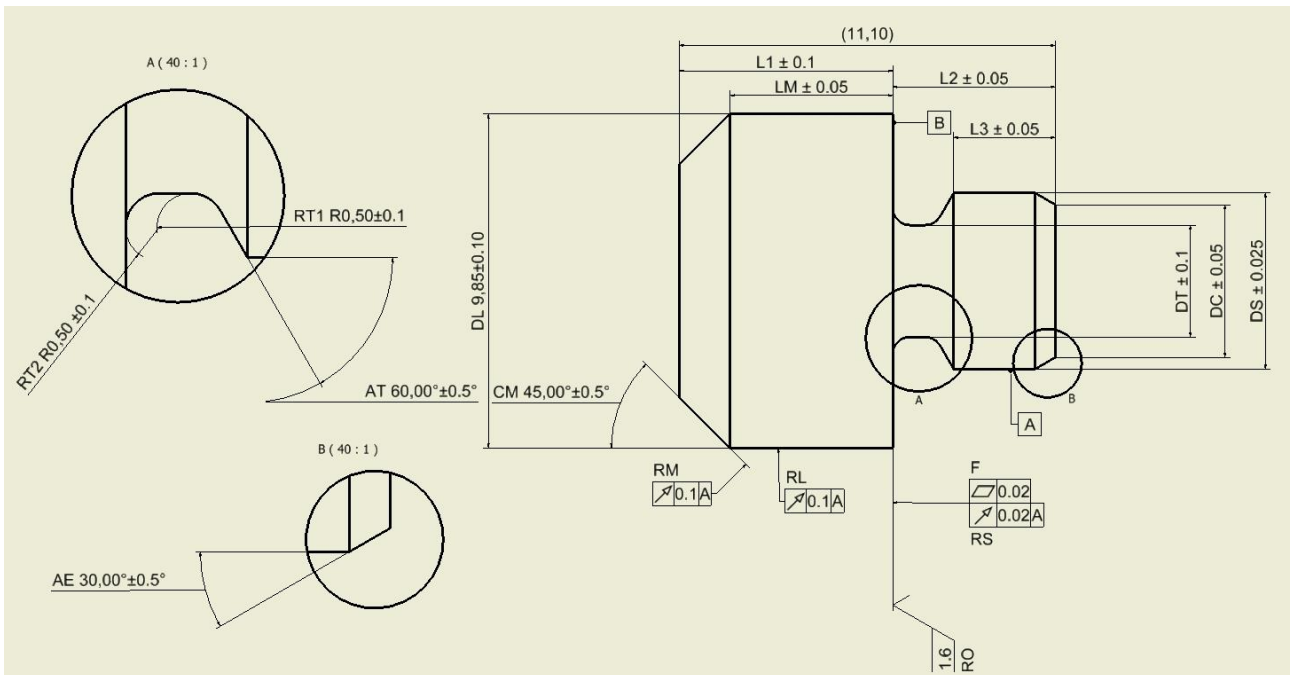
Side-view illustration of the dimensional requirements of the Top-end fuel rod endcap¹
